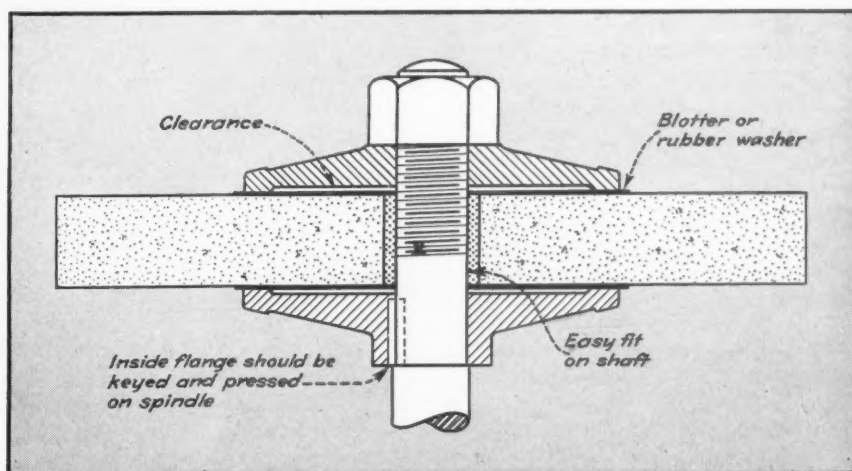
A correctly mounted wheel has an easy fit on the shaft; inner flange keyed and pressed on the spindle; both flanges of the same diameter and relieved to provide clearance and compressible washers between the abrasive wheel and flanges.
